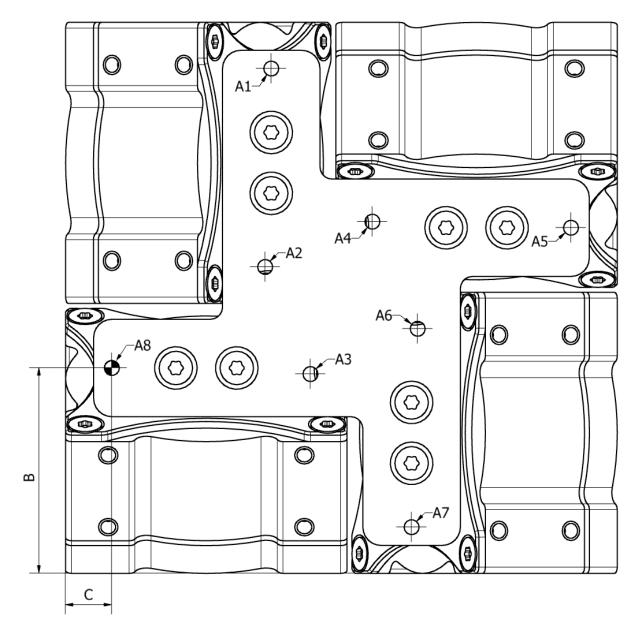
Indicative Dimensions of the CubeWheel Pyramid Base
